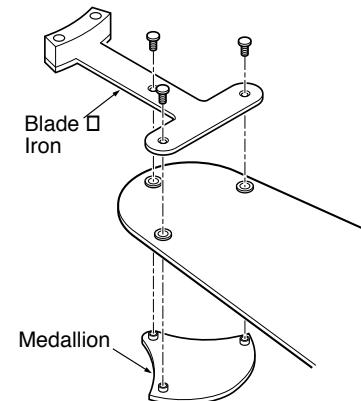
Attaching Fan Blade to Blade Iron using Decorative Medallion
